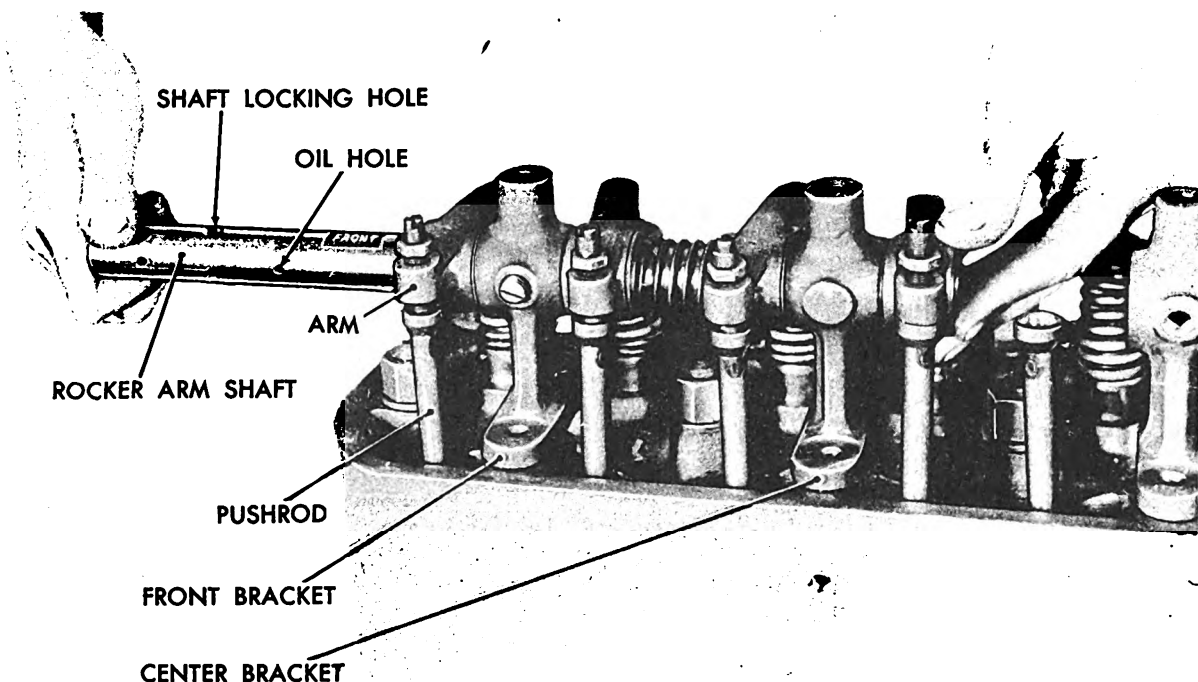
Installing Rocker Arm Shaft, Brass Washers and Springs
